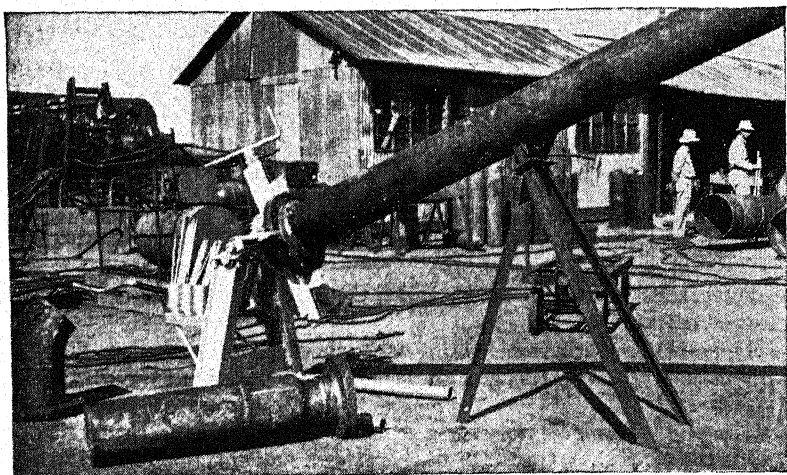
Arc welded adjustable tilting table chuck.
